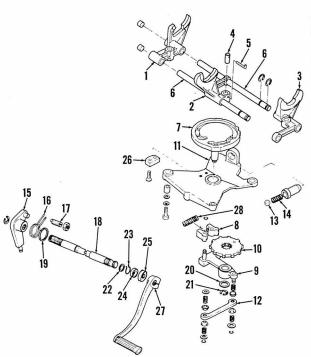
Exploded view of shift assembly. Shift fork (1) moves gear (26-Fig. Y5-19), fork (2) moves gear (20-Y5-19) and fork (3) moves gear (24—Fig. Y5-19).
